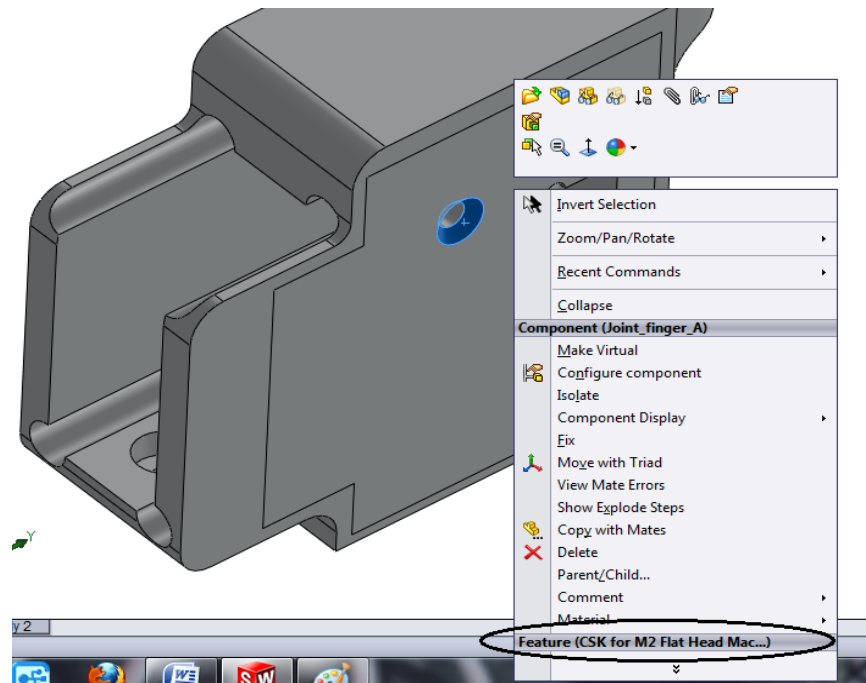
The CSK screw hole that support the servomotor with finger body
